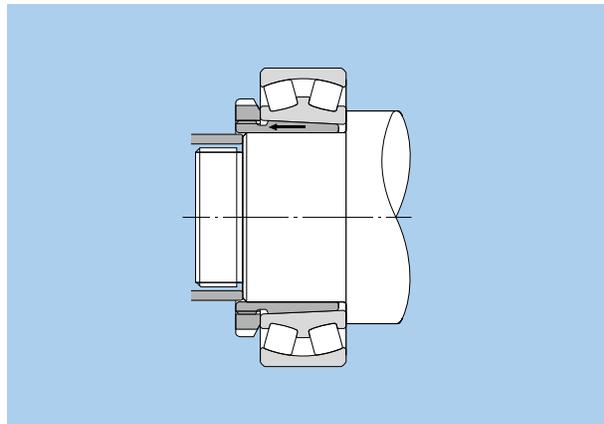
Disassembly of bearing with withdrawal sleeve
